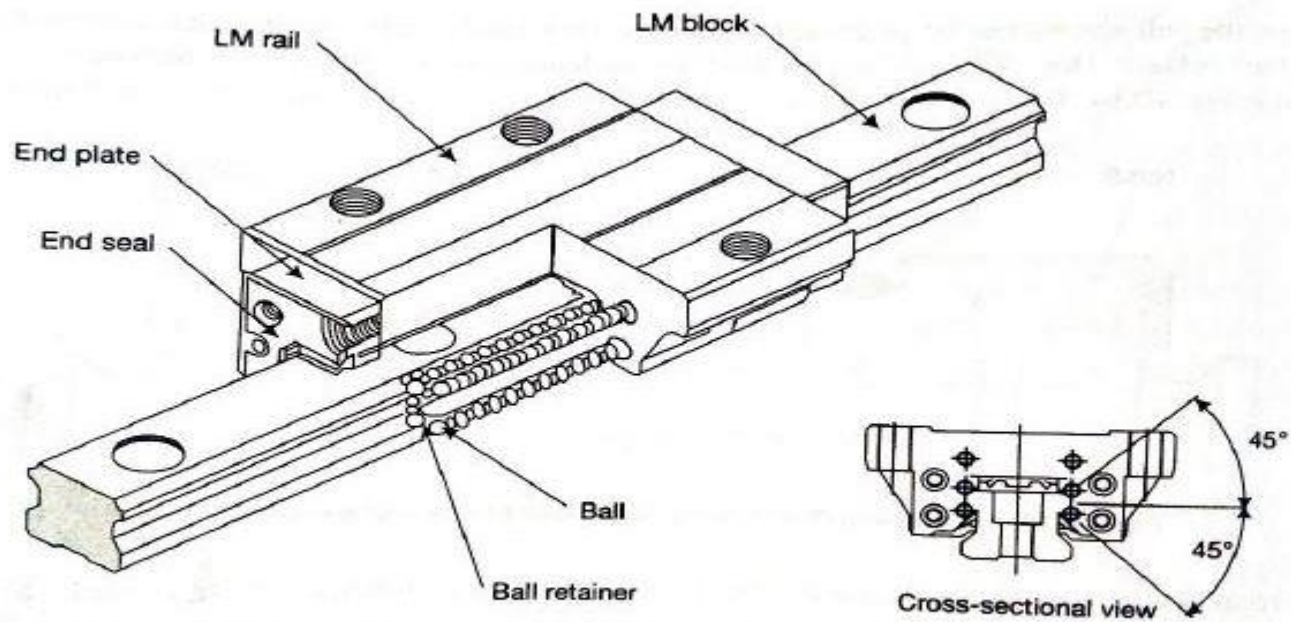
Antifriction guideways used in CNC machine tools (Courtesy, THK Co. Ltd., Japan)
